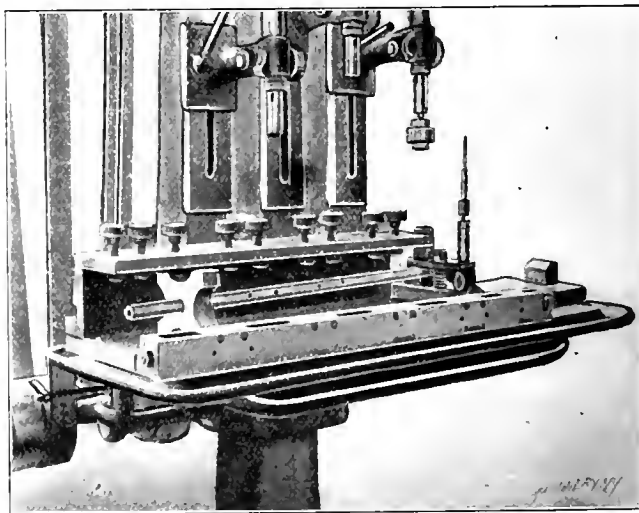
Fixtures for Drilling and Reaming Cam-shafts
